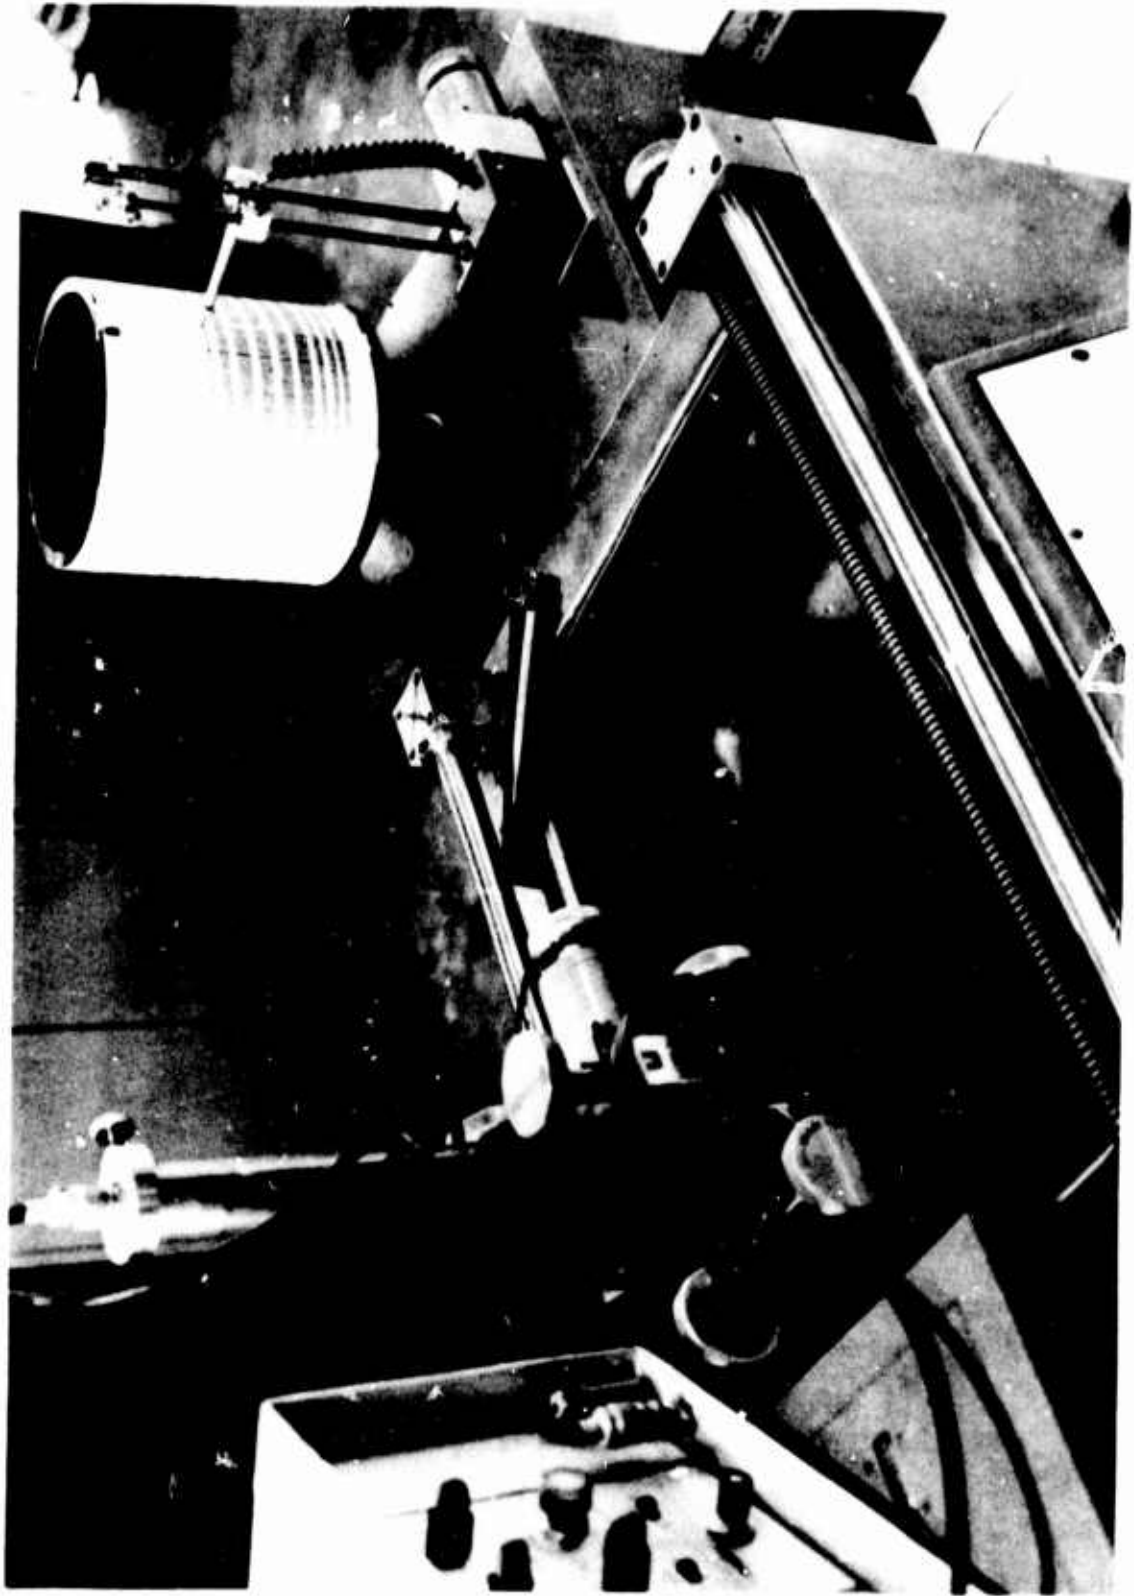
Ultrasonic Inspection Test - Second-Row Pinion.
